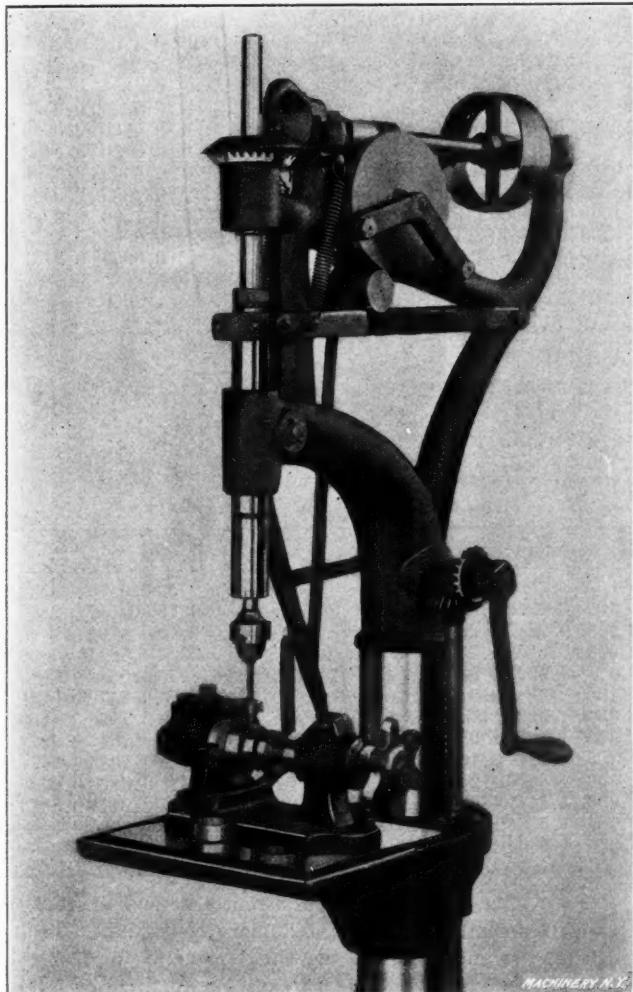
Hoefer Drill Press Adapted to drill Spanner Holes in Locking Collars automatically
